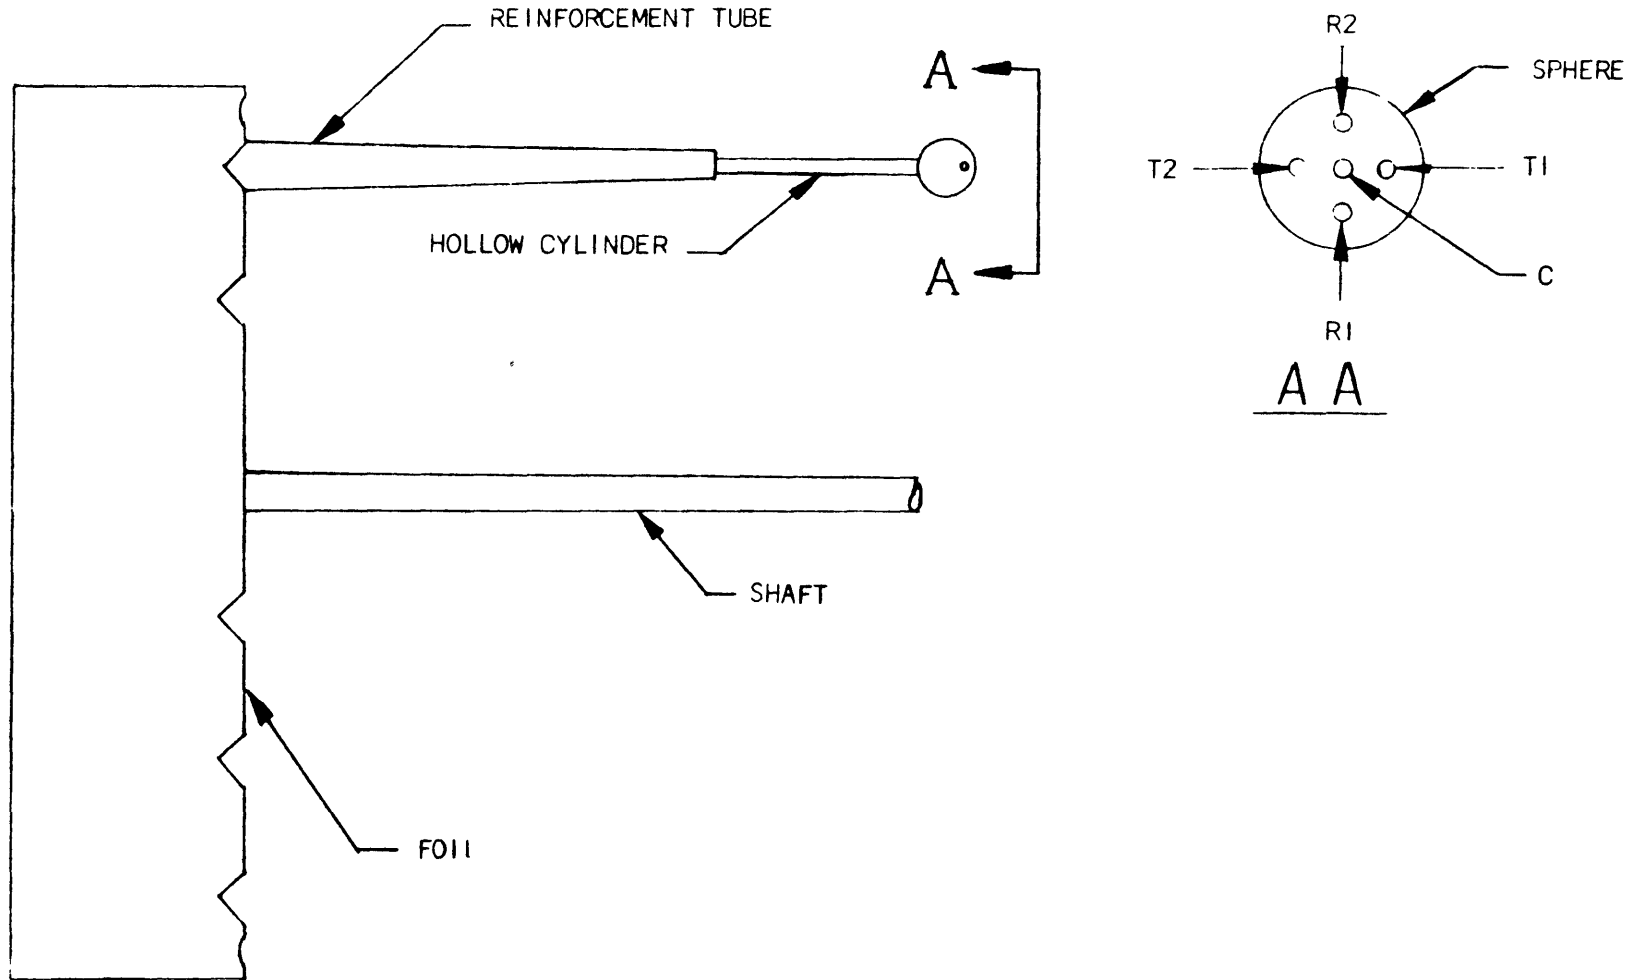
Rake Assembly Showing One Spherically Headed Pitot Tube
